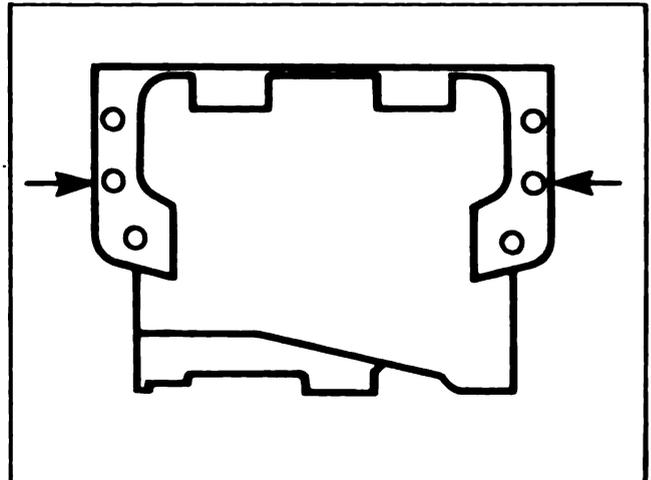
Install Two Capscrews Into The Buttruss End Of The Oil Pan.
